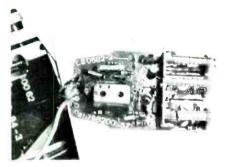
The FM tuner subassembly of a Blaupunkt "Emden III" export model receiver. This subassembly is slightly larger than that in Fig. 4 because the 1st FM IF transformer is mounted on it.
